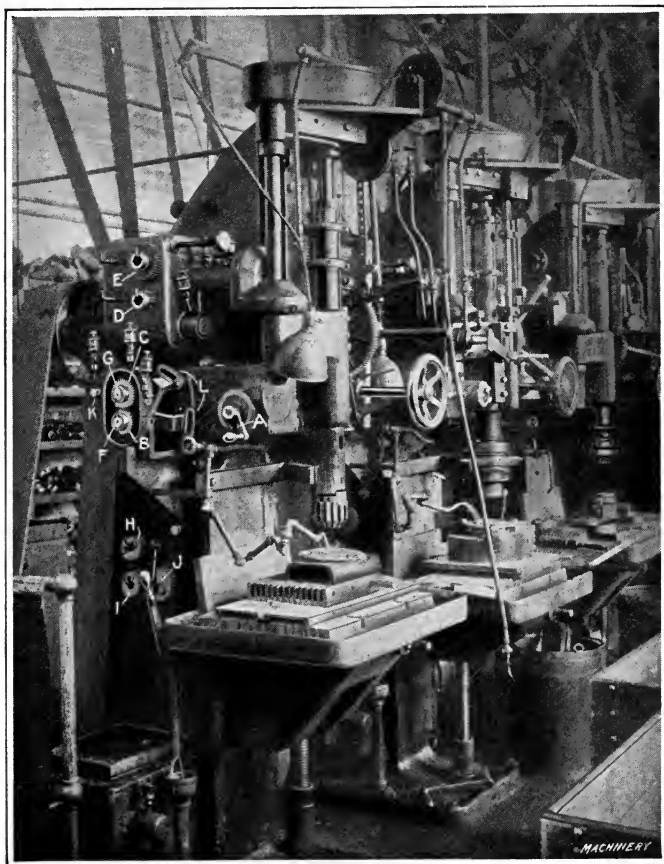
Arrangement of Special Gears introduced into Feed Train to Provide for Performing Threading and Tapping Operations
